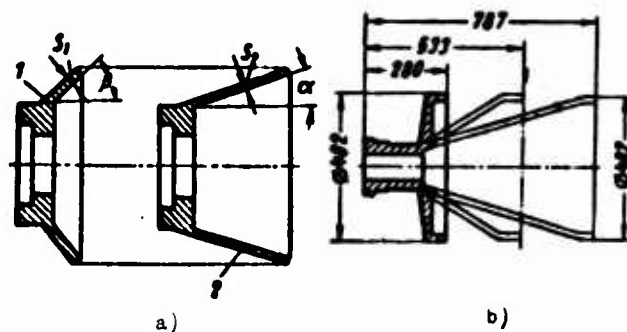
Diagram of process of pressing with rolling; a) forged blank; b) forged blank with bored cup in it; 1 - blank; 2 - part.
